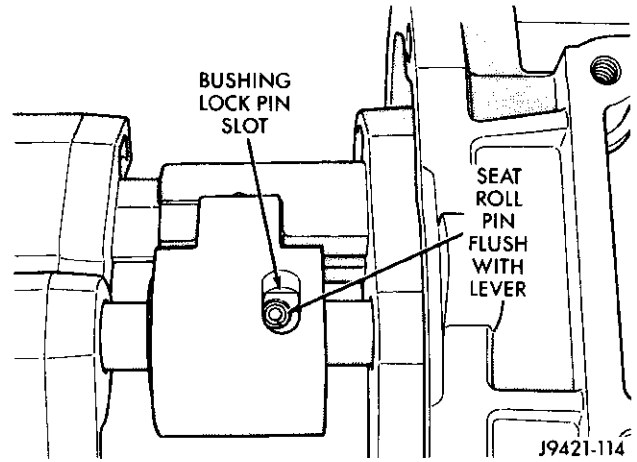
Correct Seating Of Shift Shaft Lever Roll Pin
